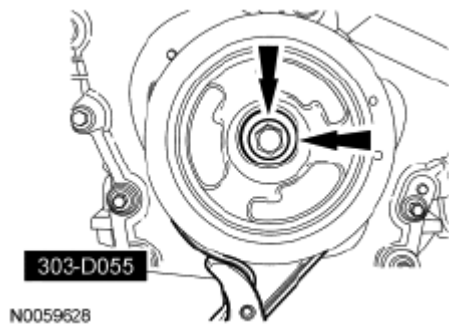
Locating Crankshaft Pulley Bolt & Washer
